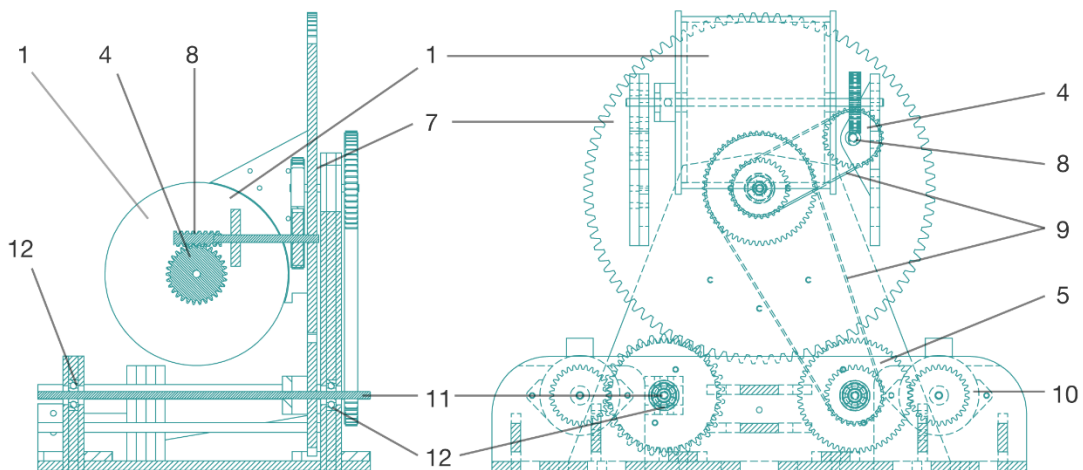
Improved fibre coating apparatus General Arrangement drawing
